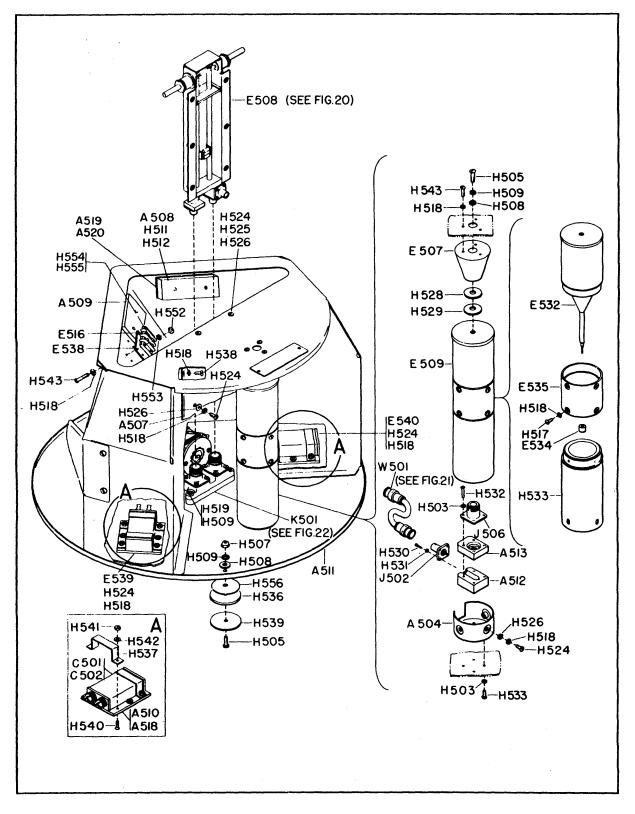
Antenna Assembly AS-435/APA-69 (Sheet 2 of 2)
